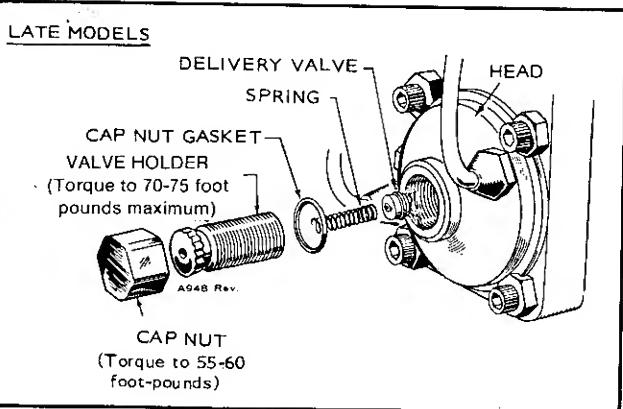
DELIVERY VALVE ASSEMBLY
